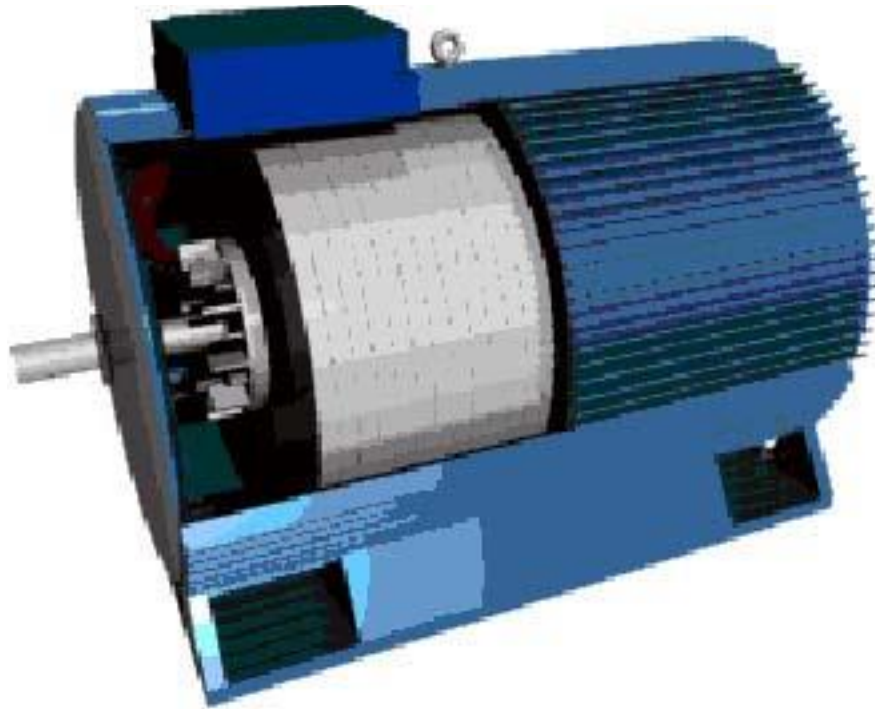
Cutout of electrical generator. The finned surface provides cooling. The rotor is enclosed inside the stator shown as the shining magnetic steel cylinder. An internal cooling fan is mounted at the end of the rotor. The ring on top is used in hoisting the generator.
